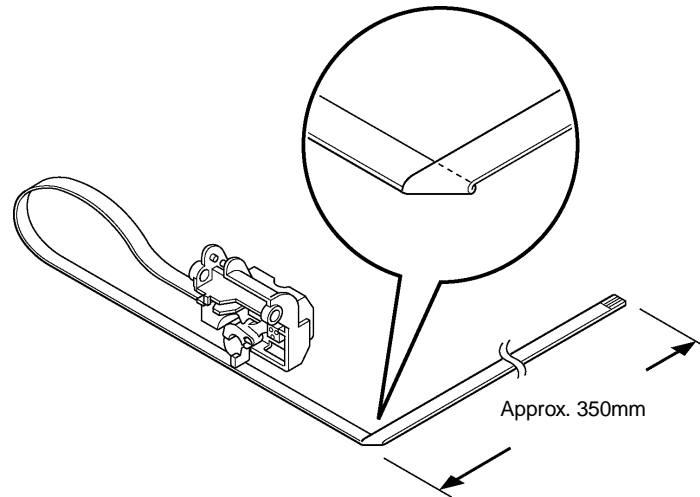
Bending the Sensor Flat Cable to the Dimensions
